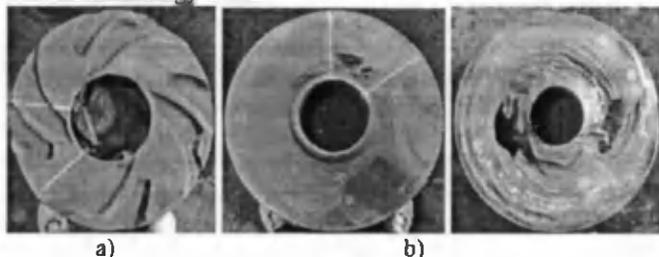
General view of the working parts of a centrifugal pump Crnz local production: a-liner to; b-rotor; c-worn appearance of the impeller.
